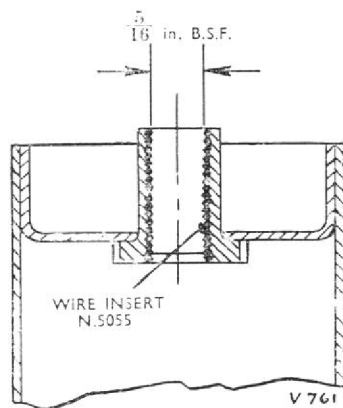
Section A-A mod. 187, showing wire insert fitted to boss.
